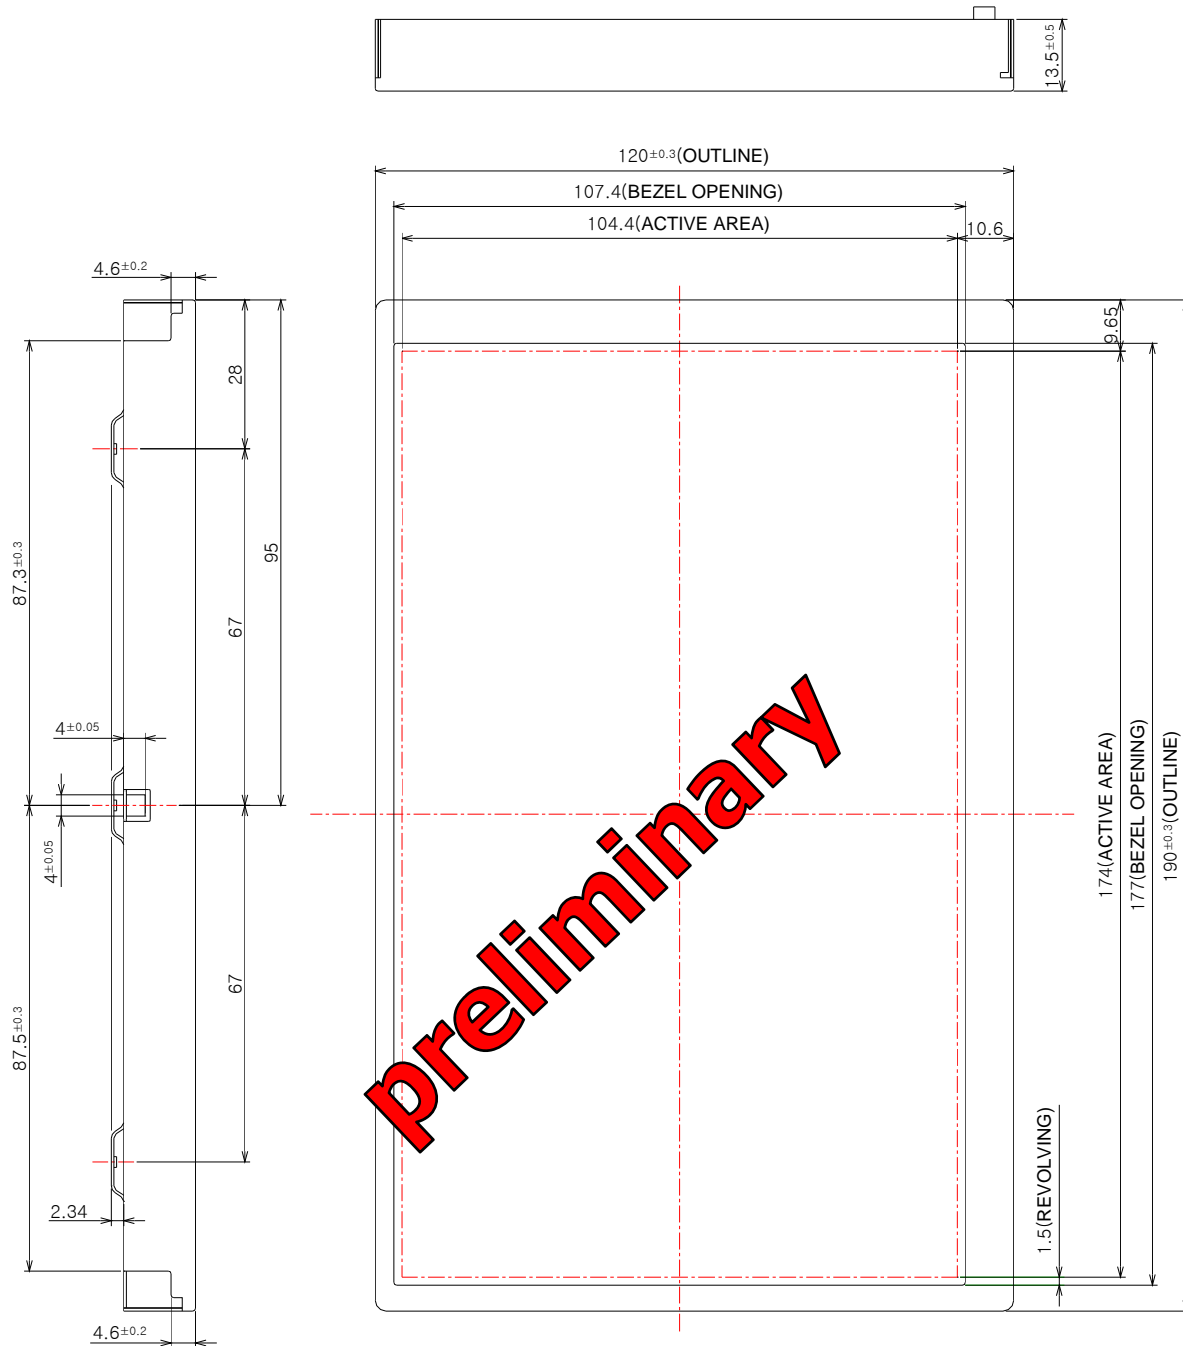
TFT-LCD Module Outline Dimensions (Front View)
